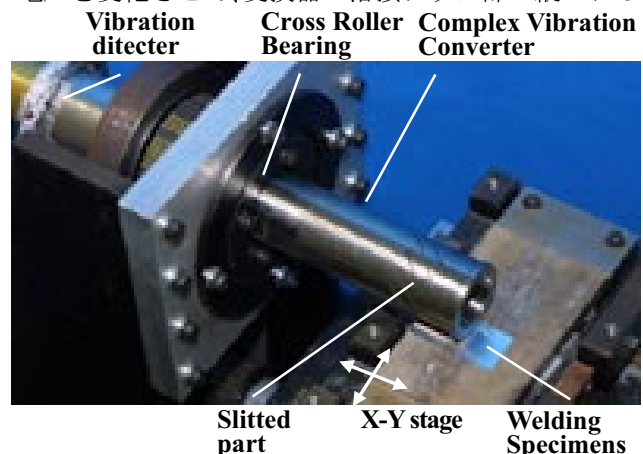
Configuration of a 19 kHz complex vibration ultrasonic seam welding system using a longitudinal-torsional vibration converter and a circular welding tip vibrating in elliptical locus.
